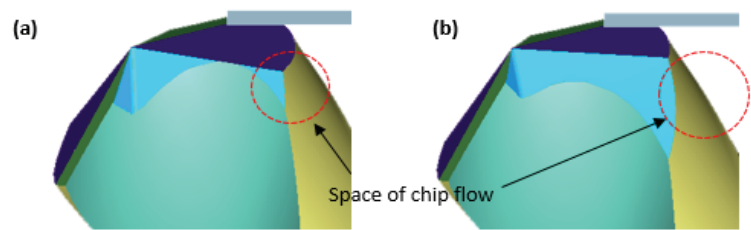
Space for chip flow showing two geometries with same primary clearance angle and point angle where (a) drill with 30° of chisel edge angle (b) drill with 45° of chisel edge angle.
